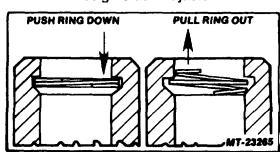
Removing Current Design Slack Adjuster Piston Retaining Ring
